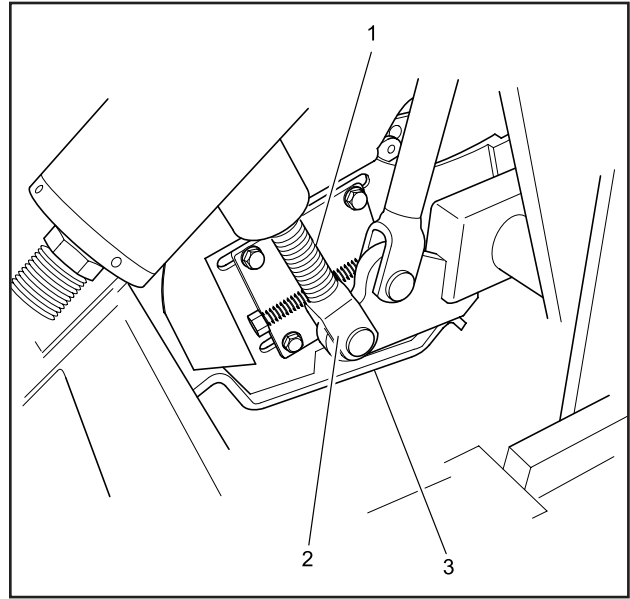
FEEDER ASSEMBLY ADJUSTMENT
